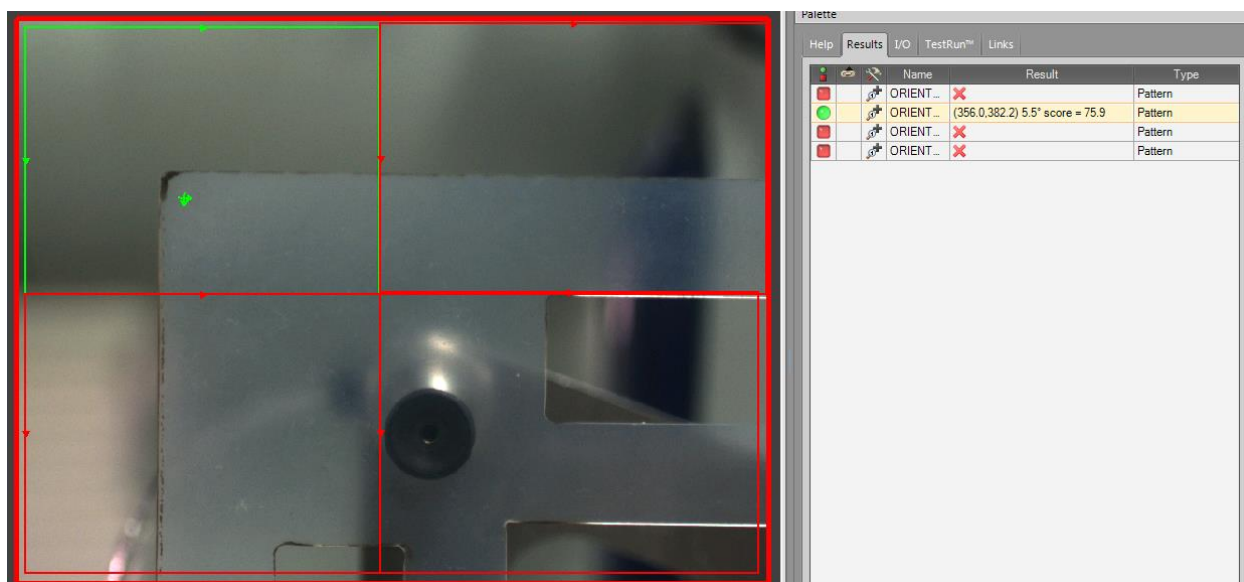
False positive from improperly cleaned gasket edge due to laser cutting debris.
